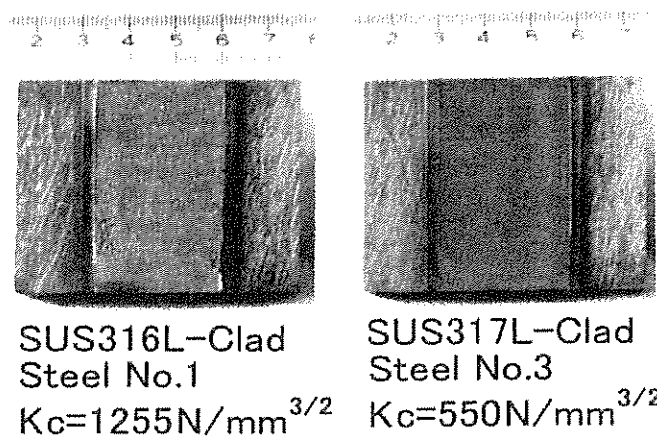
Fracture surface at bonded interface of cruciform type specimen (R.T.)
